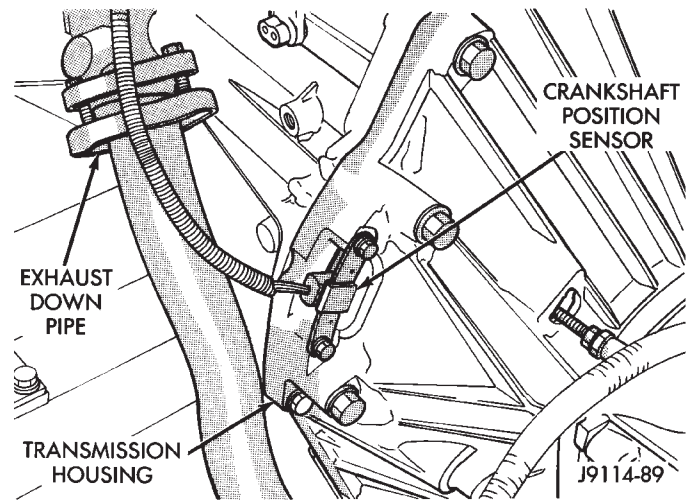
Crankshaft Position Sensor—2.5L 4-Cyl. Engine—Typical
